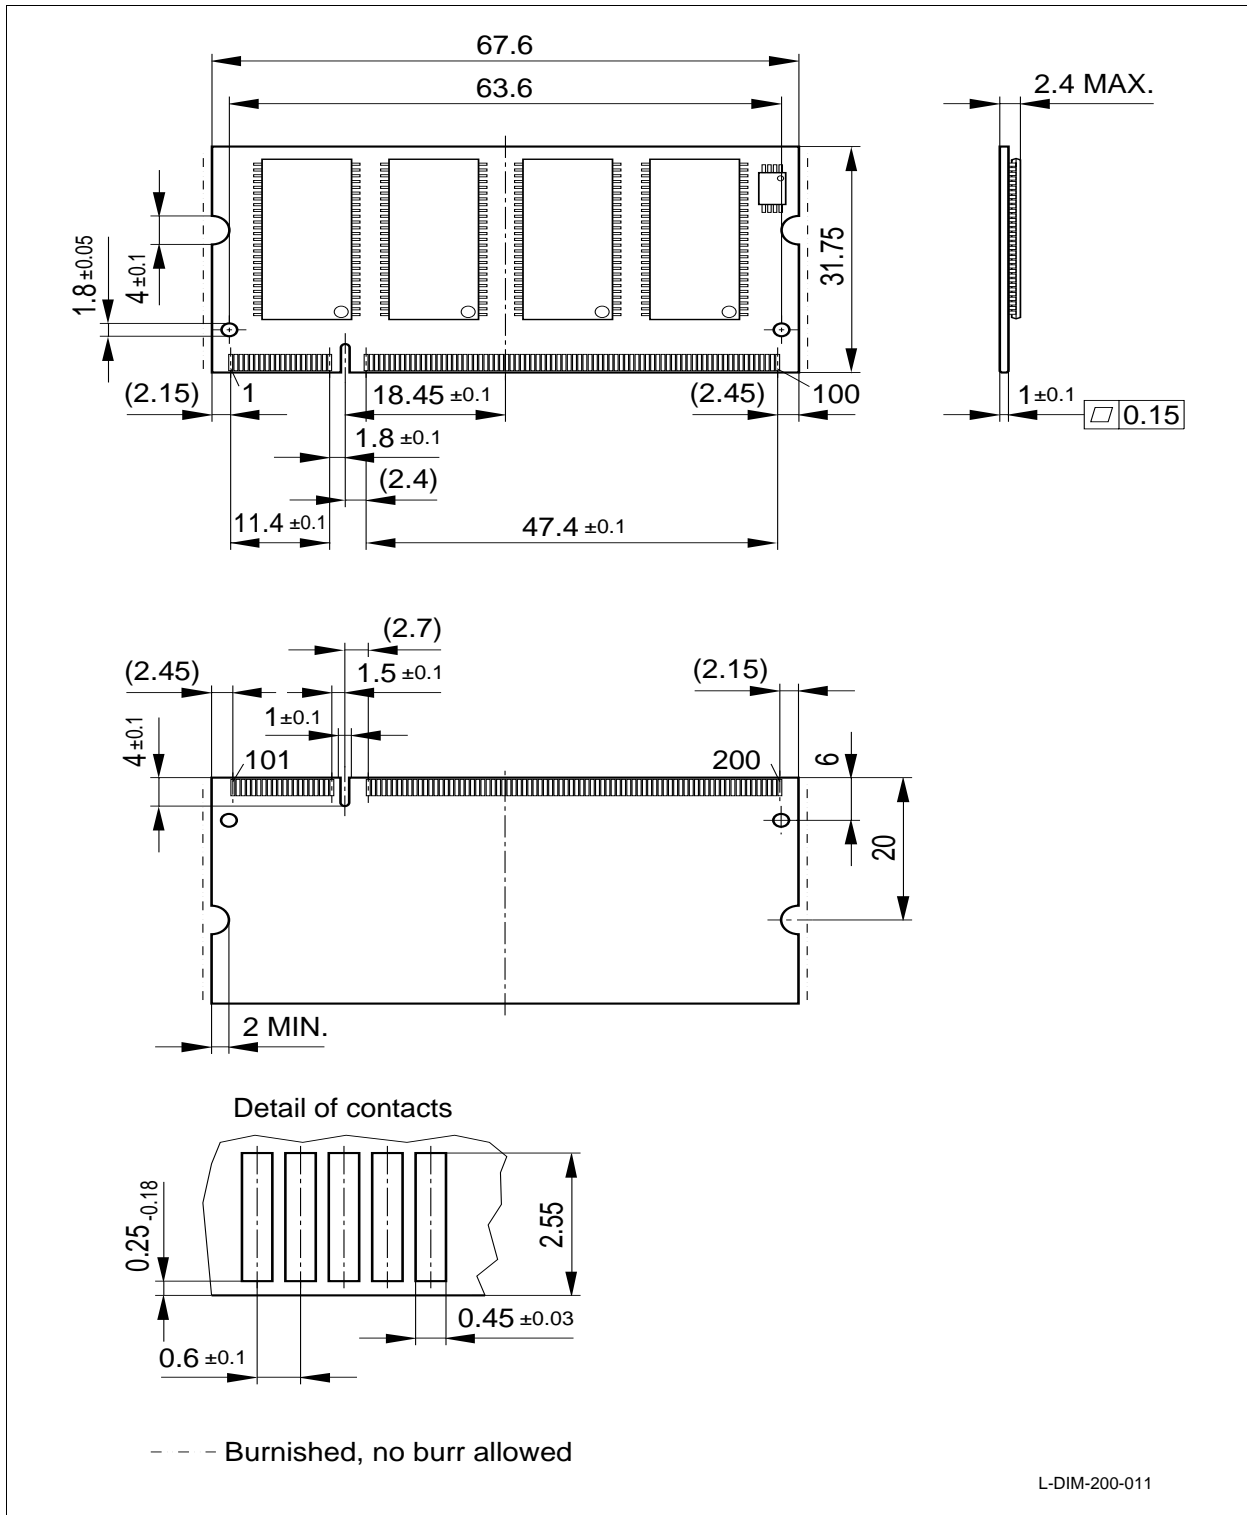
Package Outlines Raw Card C DDR SDRAM SO-DIMM Modules HYS64D1600xGDL-[6/7/8]-B
